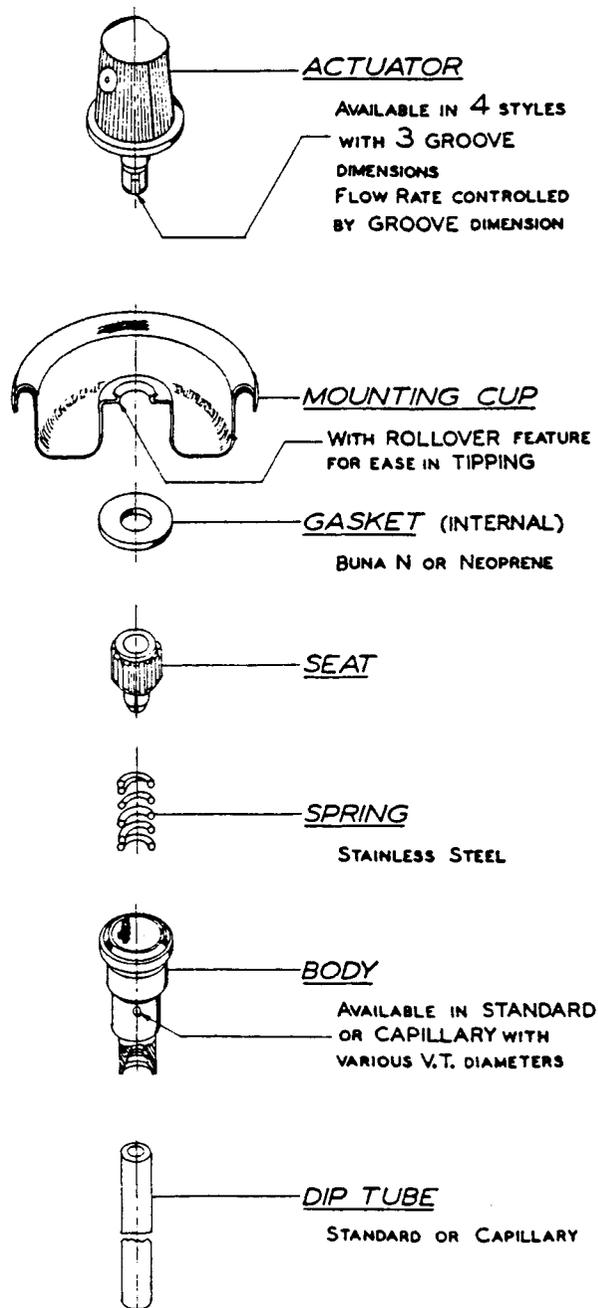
Exploded View of CA-78 Female Aerosol Valve Offered by Summit Packaging Systems, Inc.
